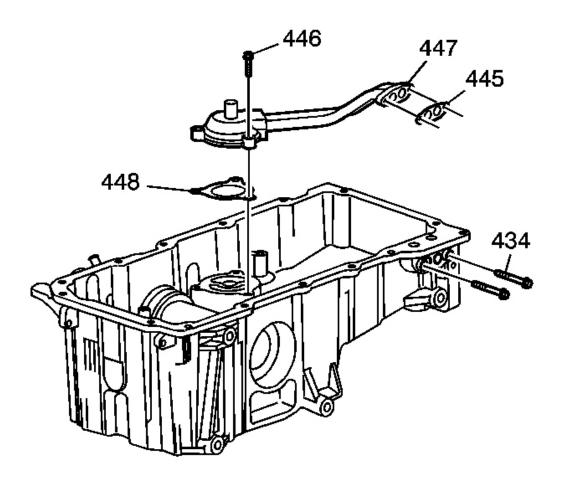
Oil Transfer Tube Courtesy of GENERAL MOTORS CORP.
